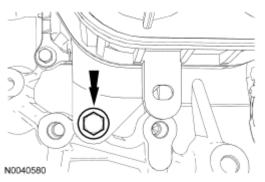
Locating Intake Manifold Lower Bolt Courtesy of FORD MOTOR CO.
